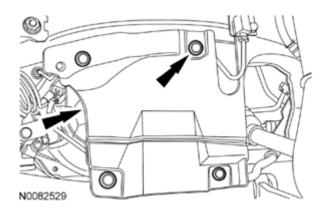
Locating RH Splash Shield And Pin-Type Retainers Courtesy of FORD MOTOR CO.
